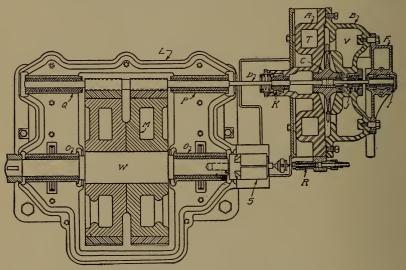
Horizontal Section of De Laval Single-Geared Turbine A, Wheel Case; B, Wheel Case Cover; C, Turbine Wheel; D, High-Speed or Pinion Shaft; F, Outboard Bearing Bracket; I, Outboard Ball-Seated Bearing; I, Outer Packing Bushing; K, Inner Packing Bushing; L, Gear Case; M, Gear; O, Gear Shaft Bearings; P, Inner Pinion Bearing; Q, Outer Pinion Bearing; Q, Voter Pin
